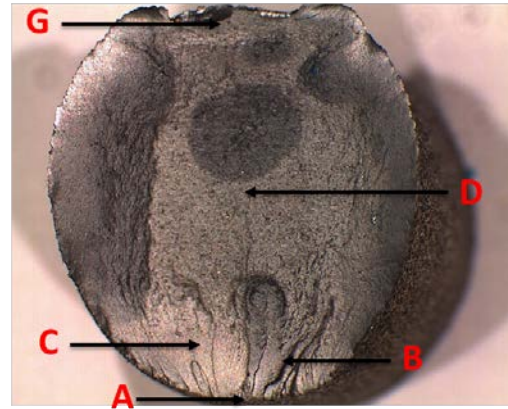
Fractograph of T6/Polished/Laser Shock Peened Test Specimen 3
